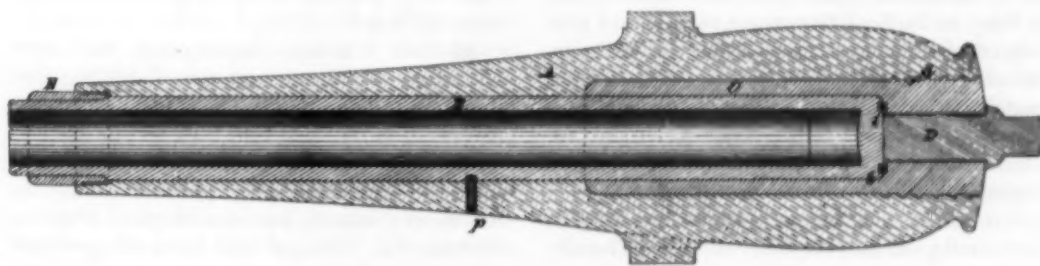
Gun D, 8-In. Muzzle-Loading Rifle With Breech-Inserted Steel-Jacketed Steel Tube (1876). (A) Casing; (B) steel tube; (C) steel jacket; (D) plug; (E) steel collar; (p) steel pin
